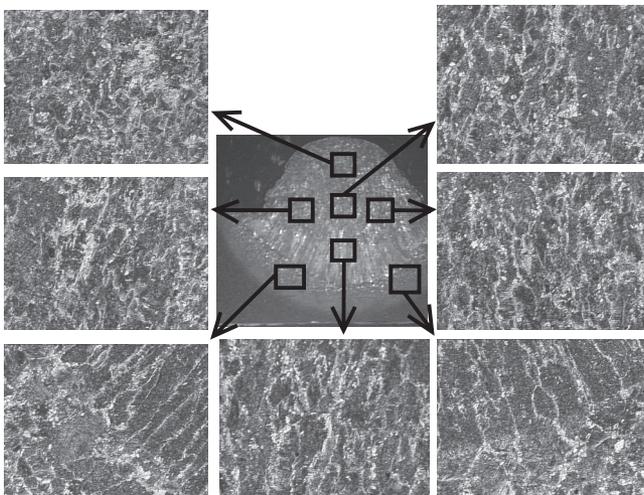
Mosaic of underwater wet weld produced with an experimental E6013 electrode using polymer as binder. Depth: 0.5 mm, polarity: DCEN; Electrode welding angle: 70°; welding current: 150 A; Chemical attach: Nital 2%; 100X^[3].
